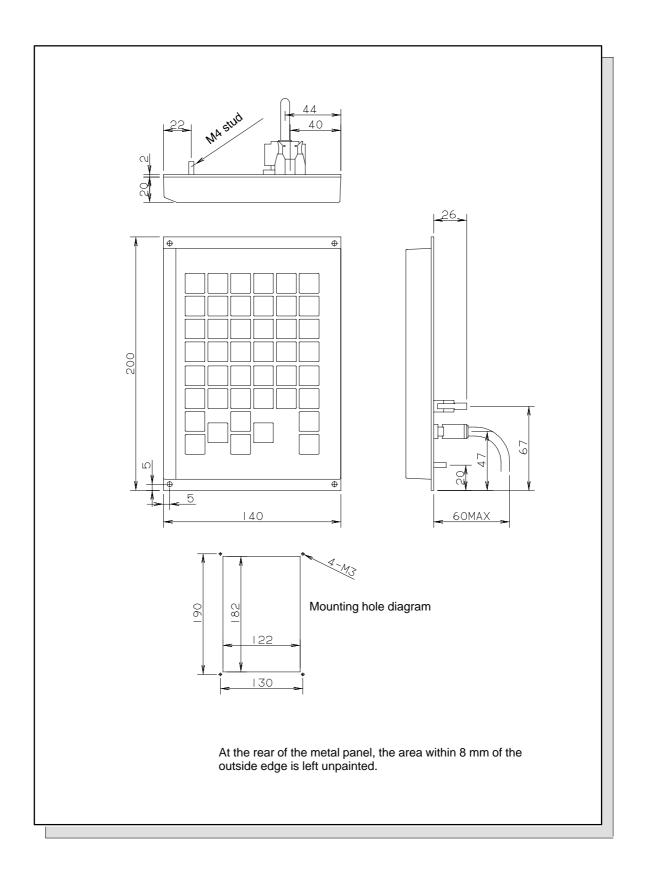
EXTERNAL DIMENSIONS OF STAND-ALONE TYPE STANDARD MDI UNIT
